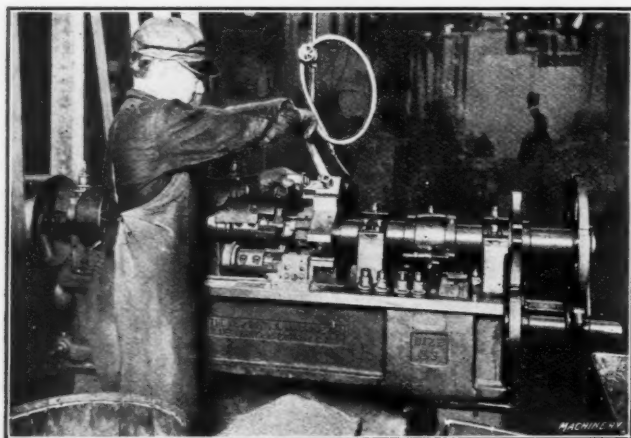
Machining Valve Plunger Guides in the New Britain Automatic
